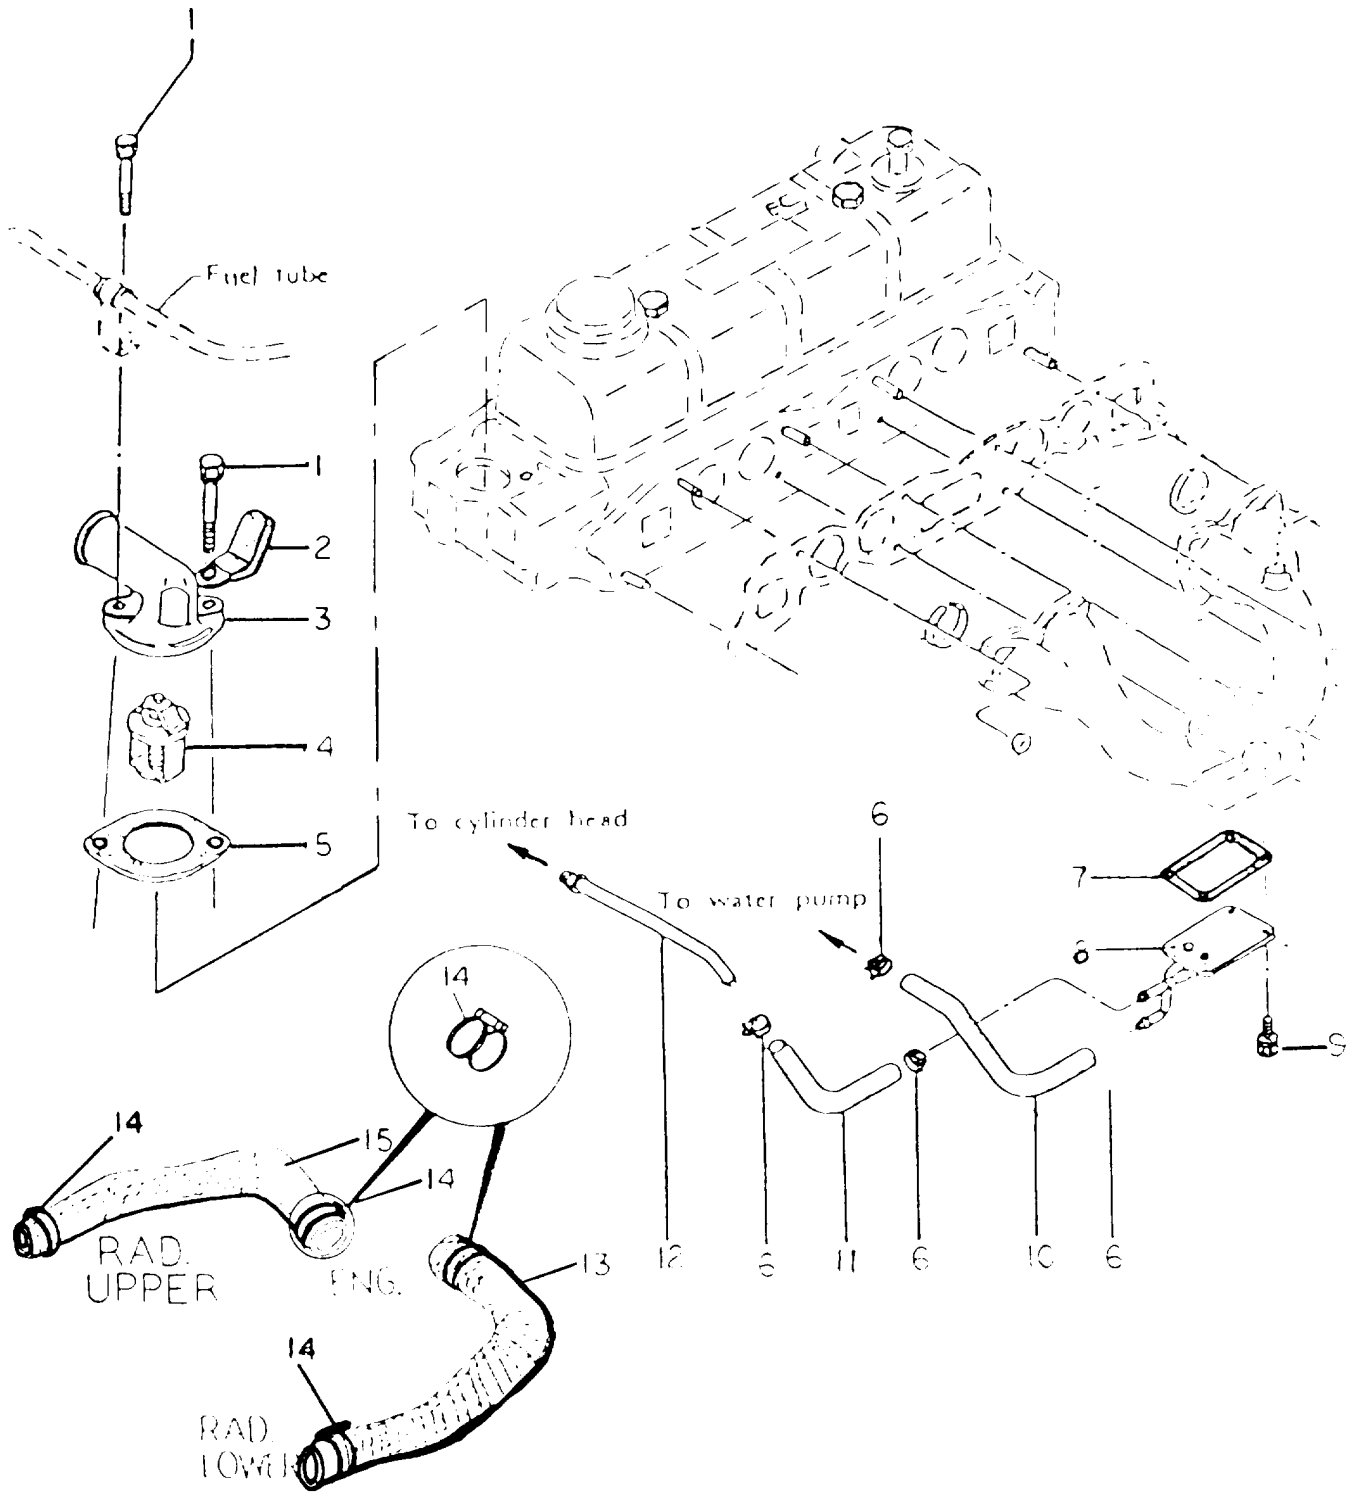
WATER MANIFOLD, THERMOSTAT & HOUSING
